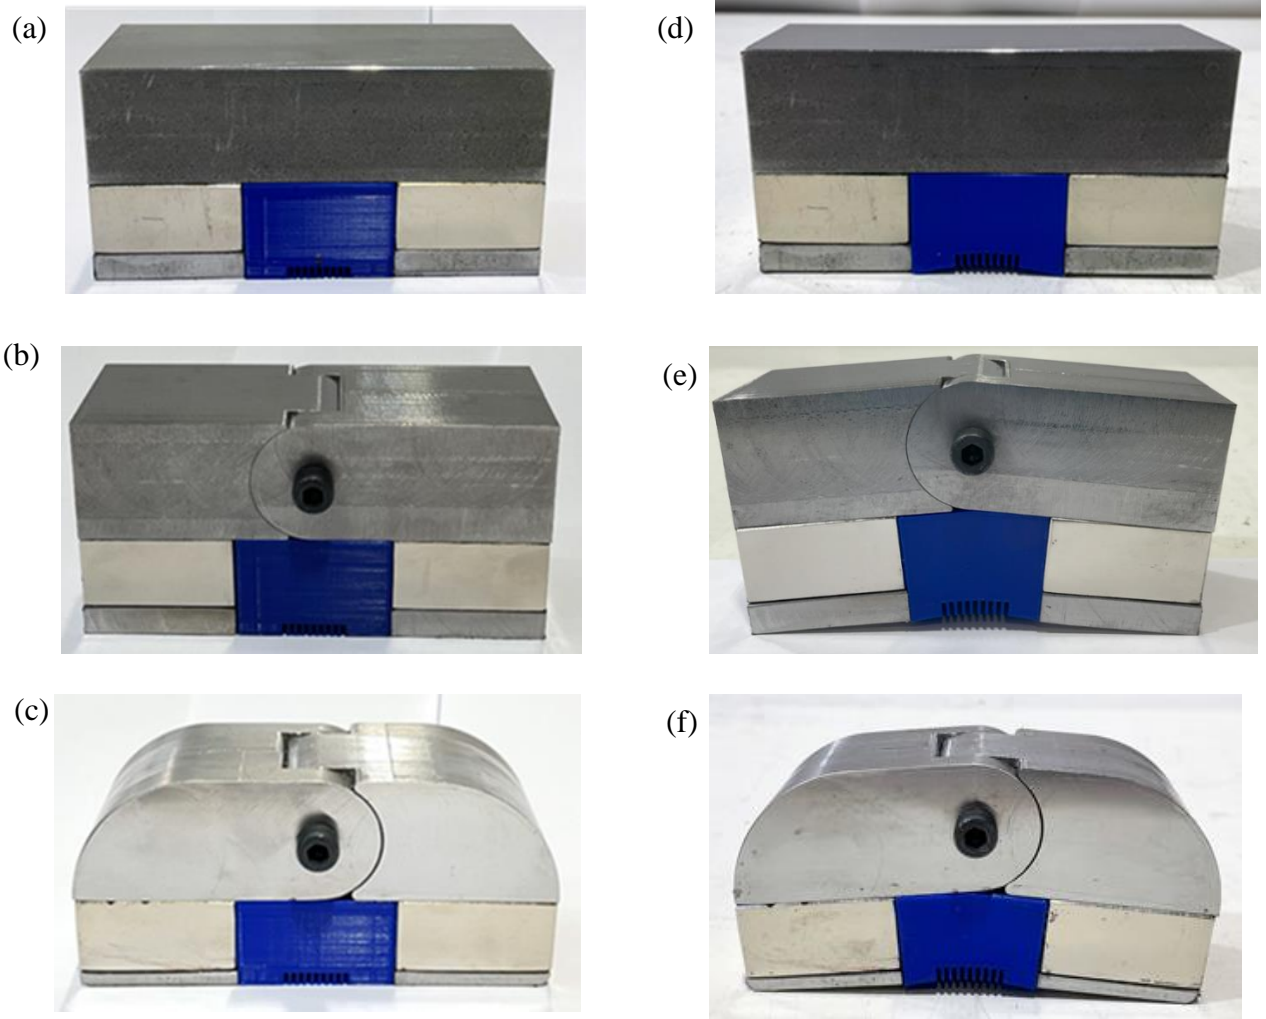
(a) The Ref circuit with the probe holder, (b) the Hin circuit with the probe holder, and (c) the Opt circuit with the probe holder to inspect the flat plate. (d) The Ref circuit with the probe holder, (e) the Hin circuit with the probe holder, and (f) the Opt circuit with the probe holder to inspect the curved surface.
